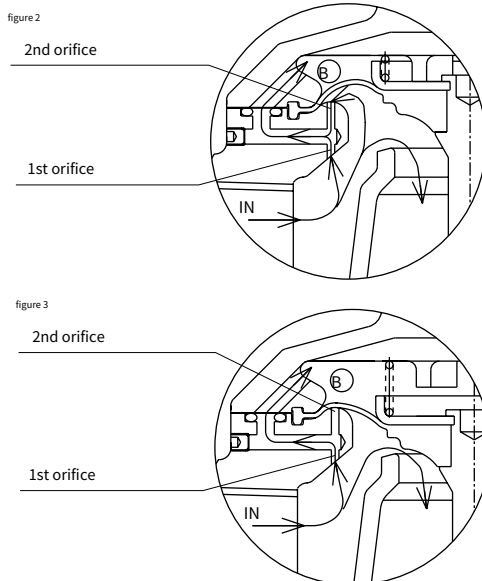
and Fig. 3 are enlarged views of Fig. 1A.
